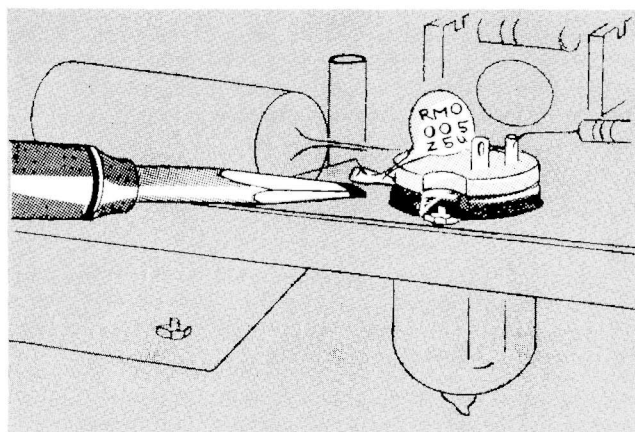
Soldering to a terminal. Note the slight fillet of solder-exaggerated for clarity-formed around the wire.
